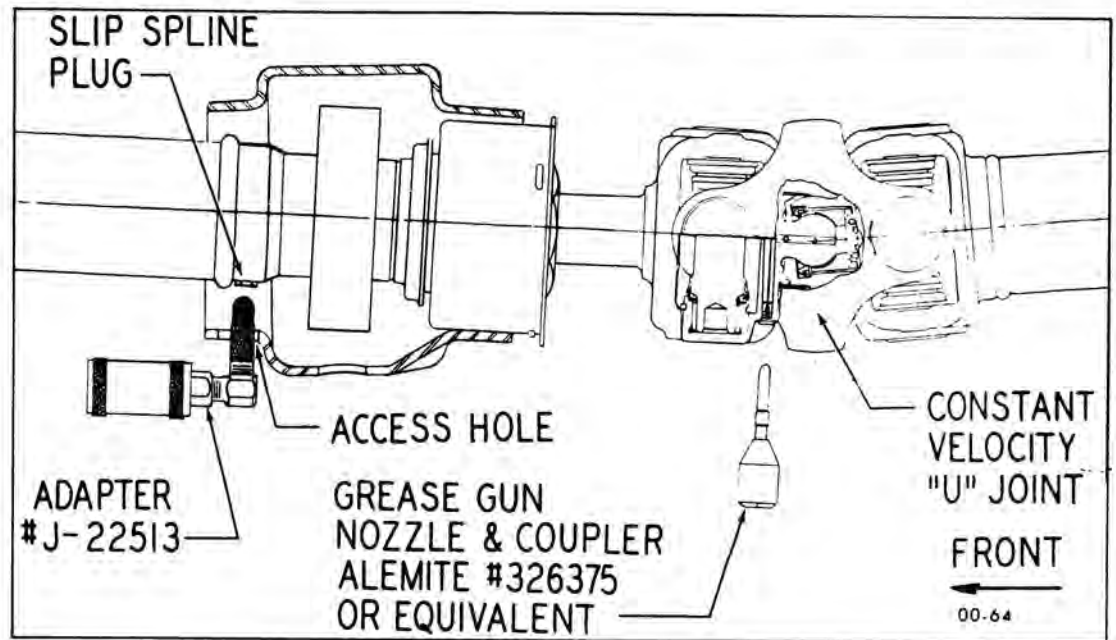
Propeller Shaft Lubrication Points (45-46-48000 Series)
